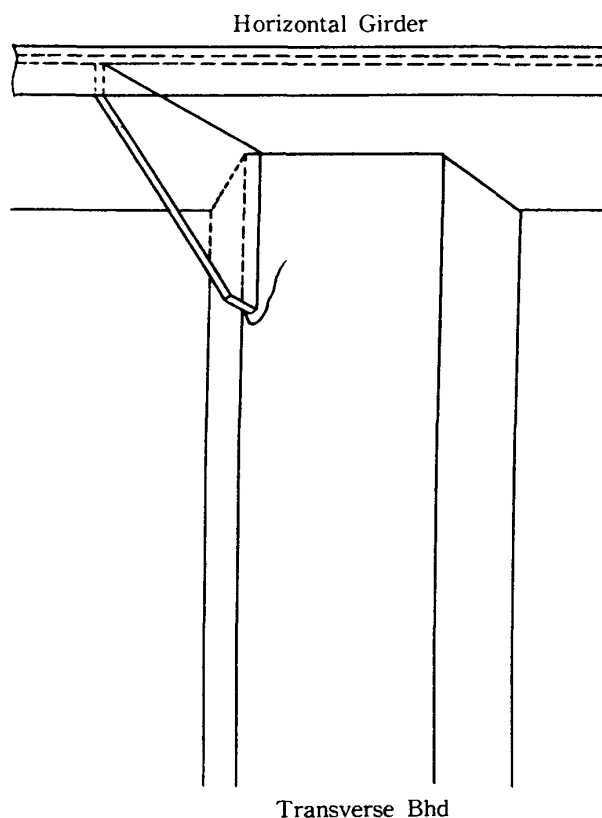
Cracks in way of tripping bracket connecting with horizontal girder
